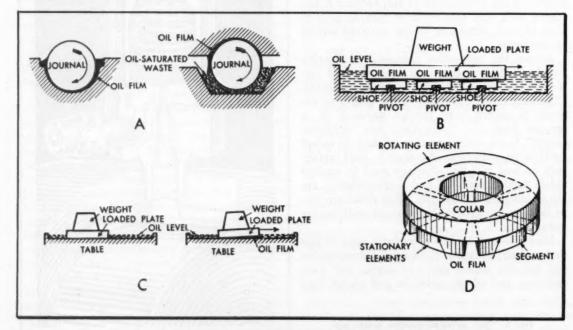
These drawings show the wedge-shaped oil film developed when a loaded surface is set in motion over a supporting surface.
